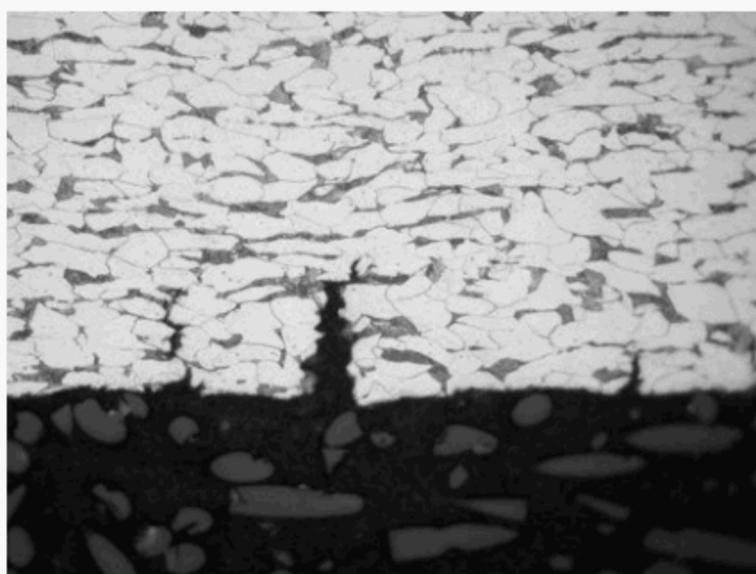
SCC Produced on Welded Carbon Steel in Fuel Ethanol
